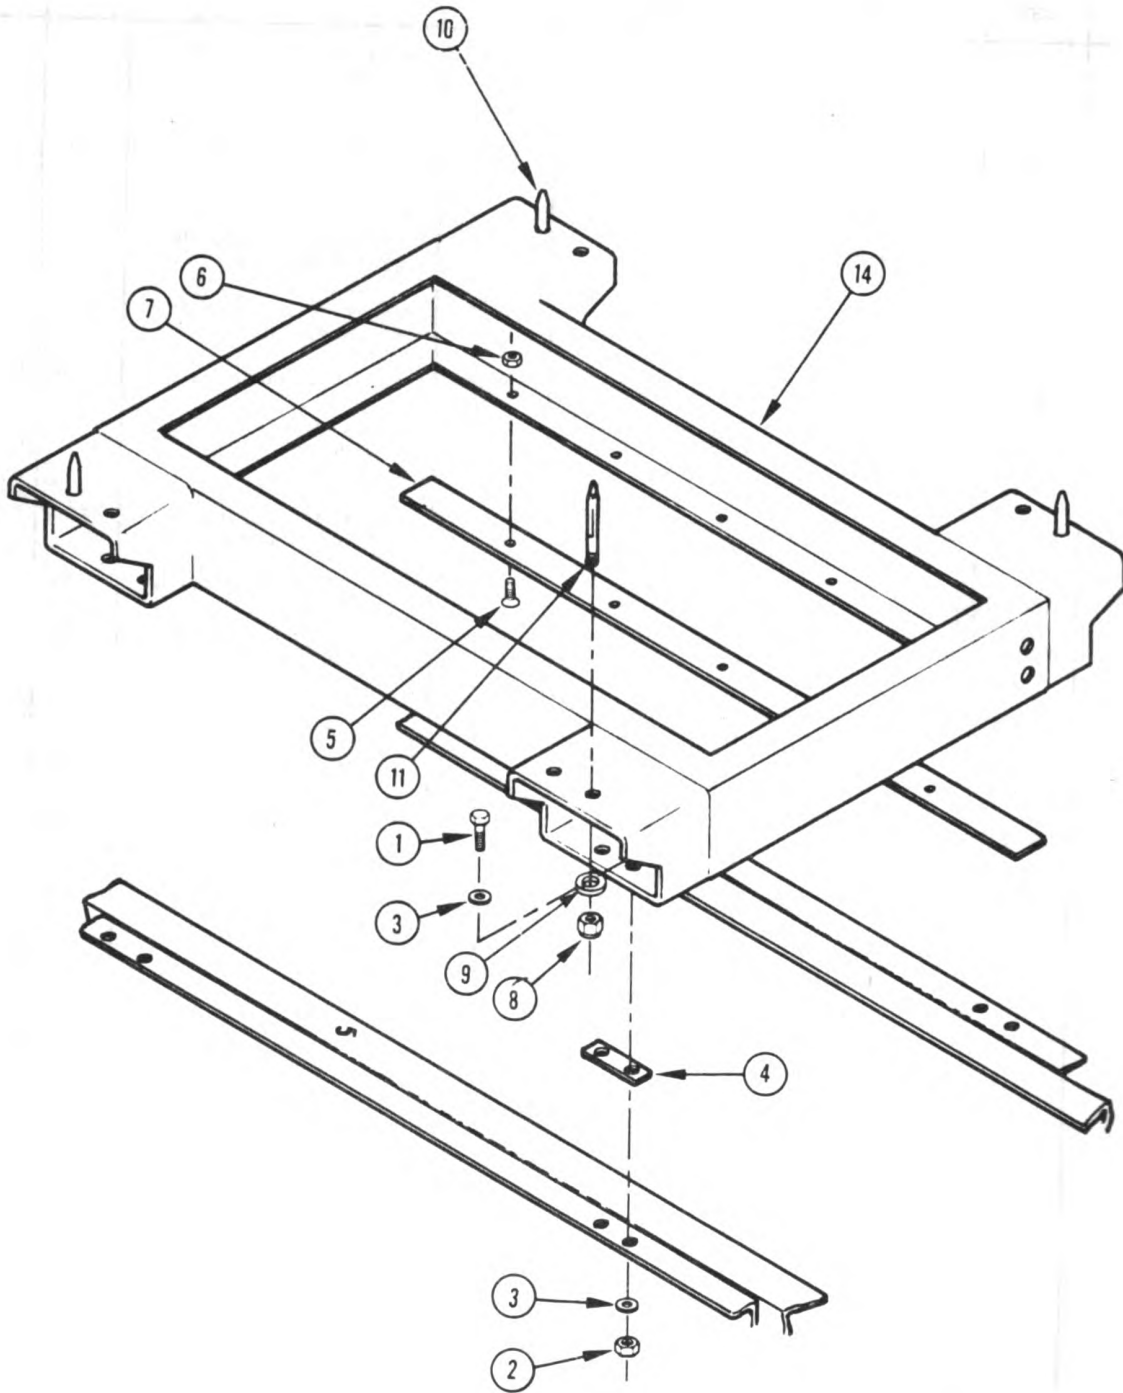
Generator Mounting Frames (Sheet 2 of 2).
